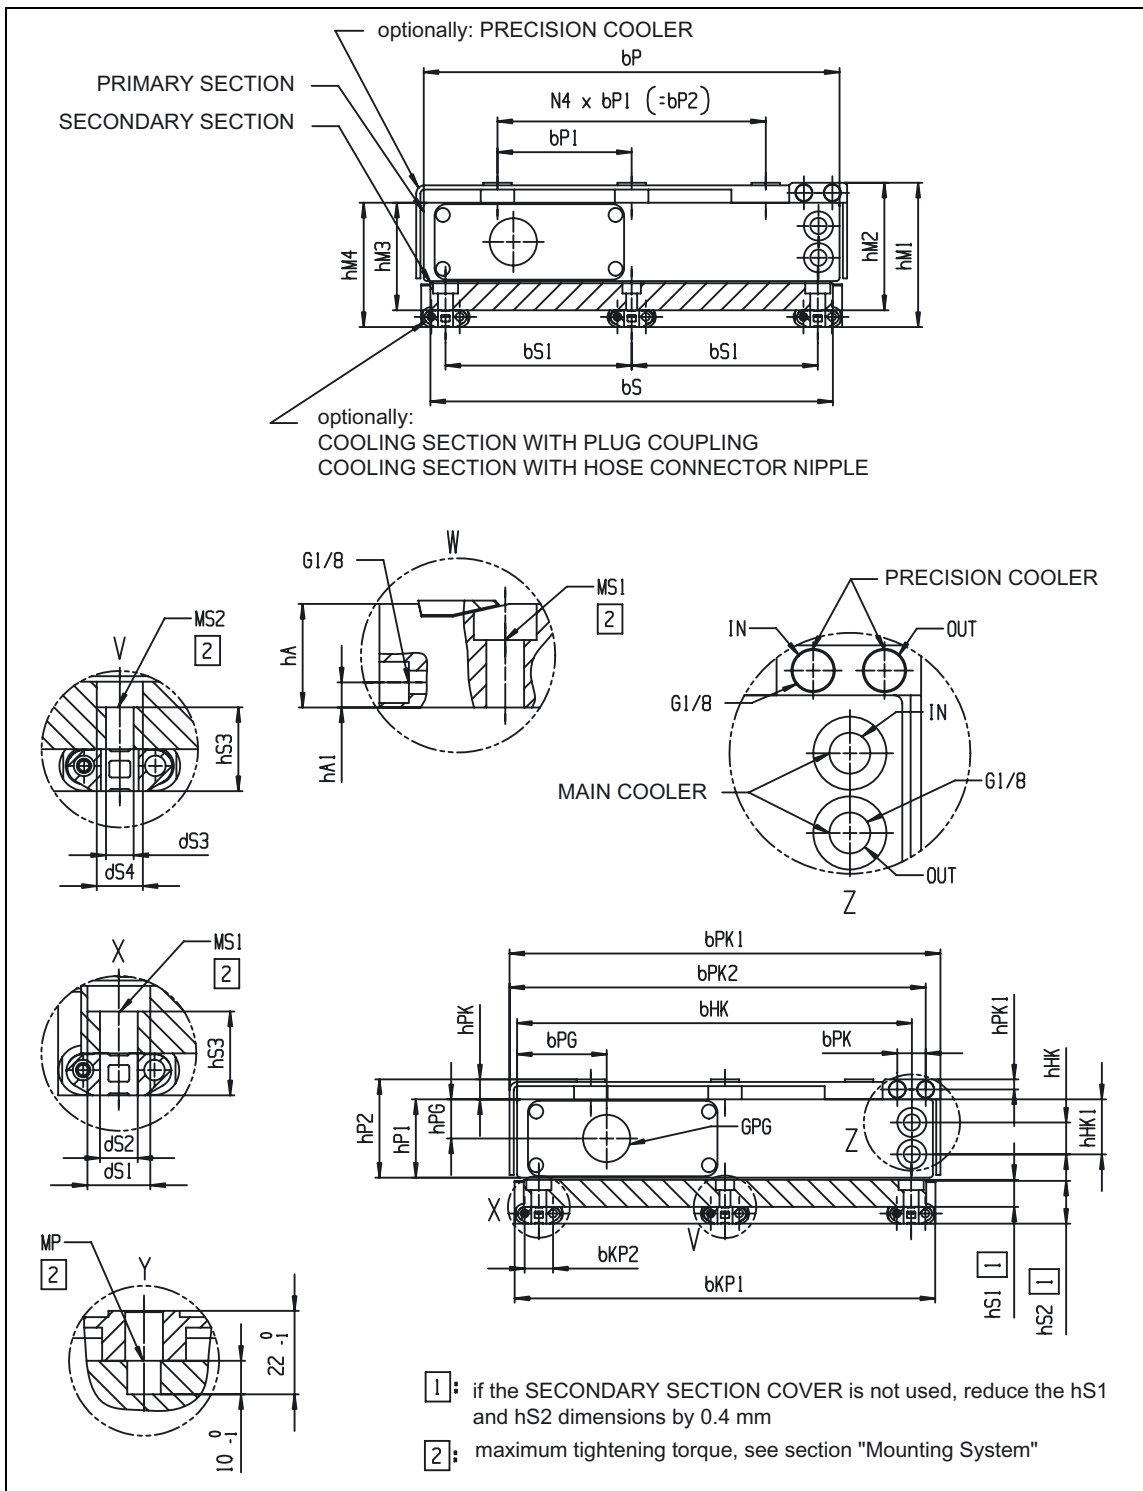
Mounting dimensions for the 1FN3600 motor models
